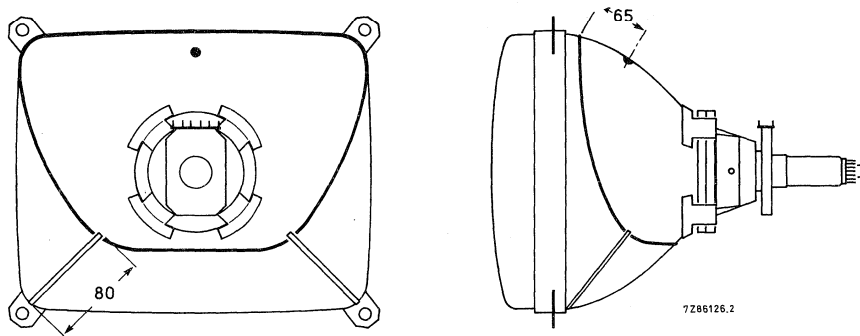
Position of degaussing coil on the picture tube; dimensions are given in mm.
